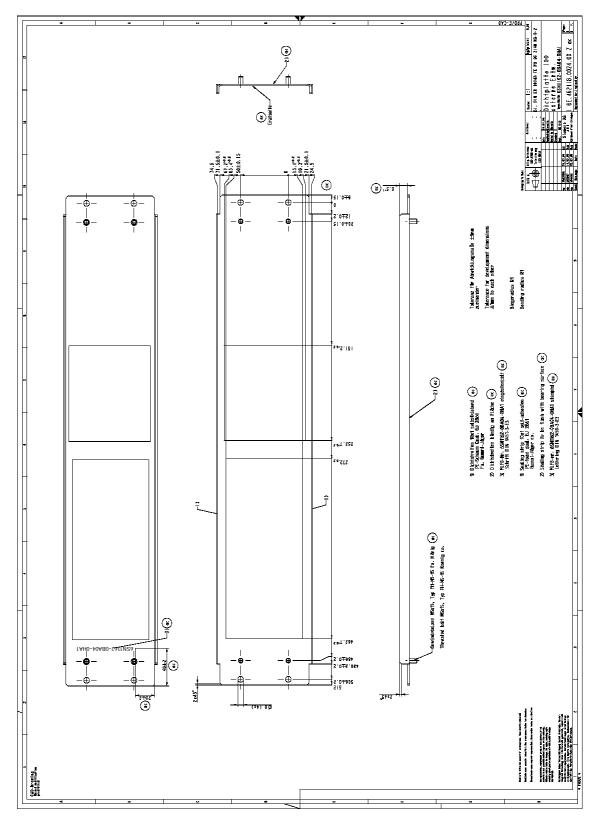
External cooling, mounting frame for cabinet installation module width 100 mm, 6SN1162-0BA04-0HA1
